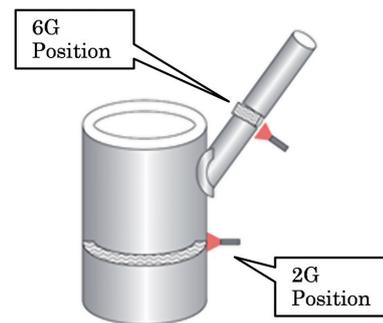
Example of welding positions required in the TOKYO SKYTREE®
